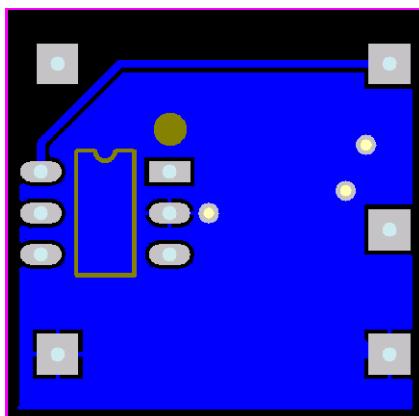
Bottom, PCB Layout for TDFN4 1.2 mm x 1.6 mm
